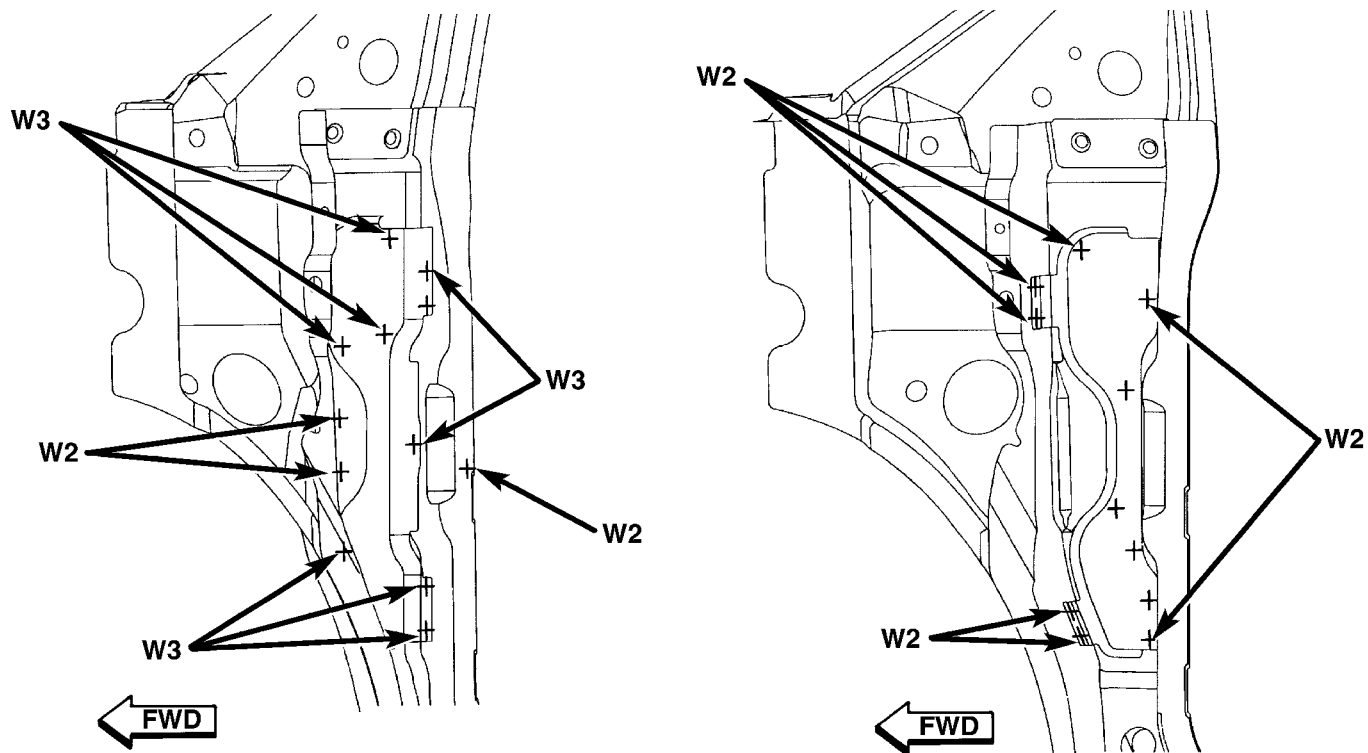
INNER BODY SIDE SILL TO LOWER DASH PANEL
